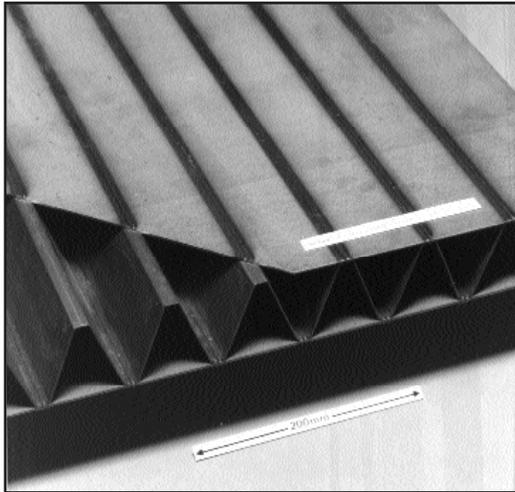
CO₂ laser welded lightweight steel structure
